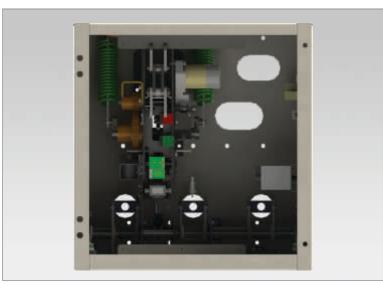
shows the front view of the operation mechanism with the front panel of the circuit breakers removed.
